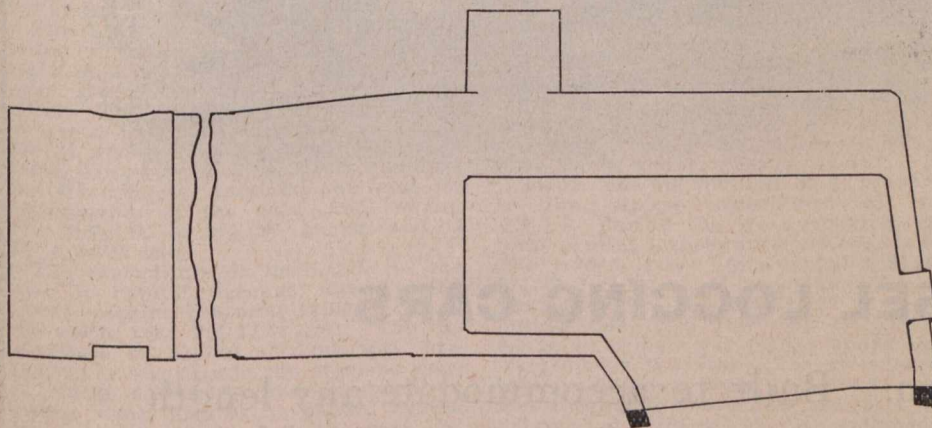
Combustion Chamber Firebox Boiler. For End Elevation See Fig. 4.
